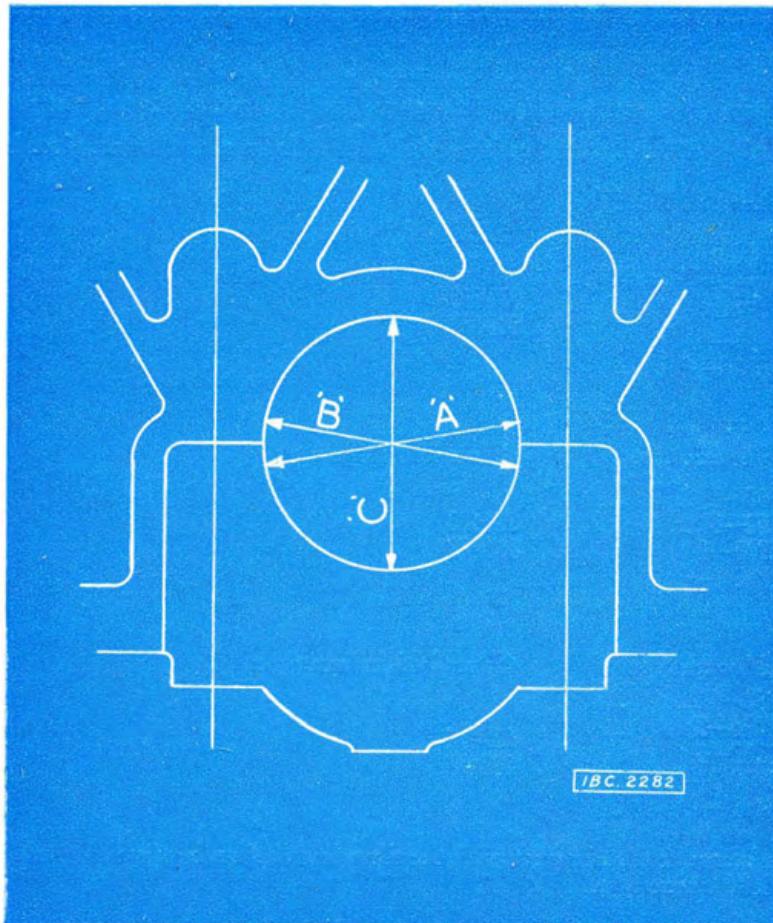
Method of ascertaining mean diameter of crankshaft main bearing housing
